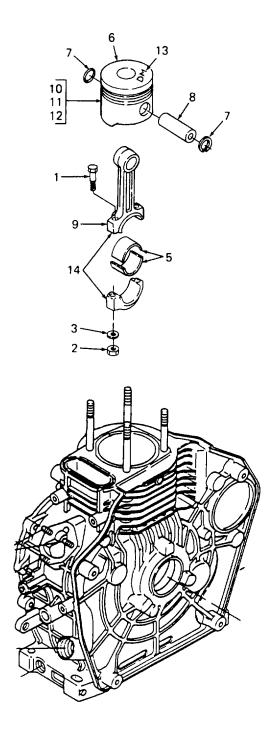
Removing and Installing Piston and Connecting Rod Assembly
